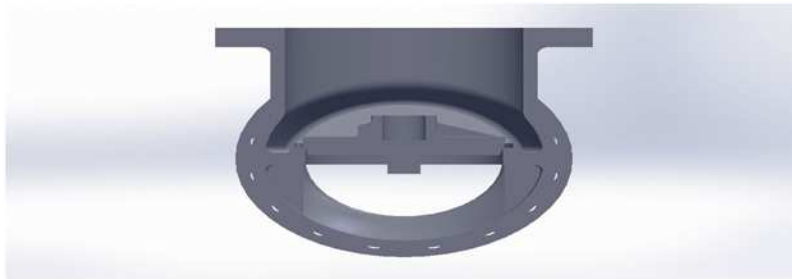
Right Side Section View Showing Supports below Disc at Extreme Ends
